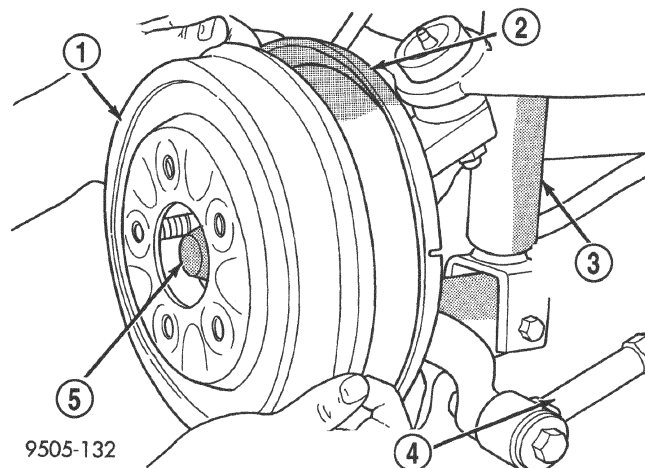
Backing Off Rear Brake Shoe Adjustment
